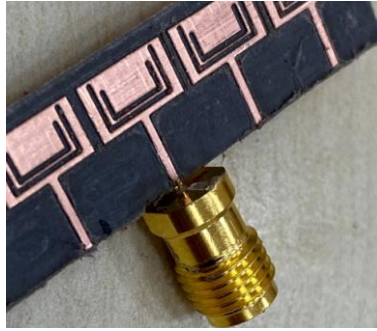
Fourth step in the fabrication process, showing the soldering of the SMA connector onto the antenna feed line.
